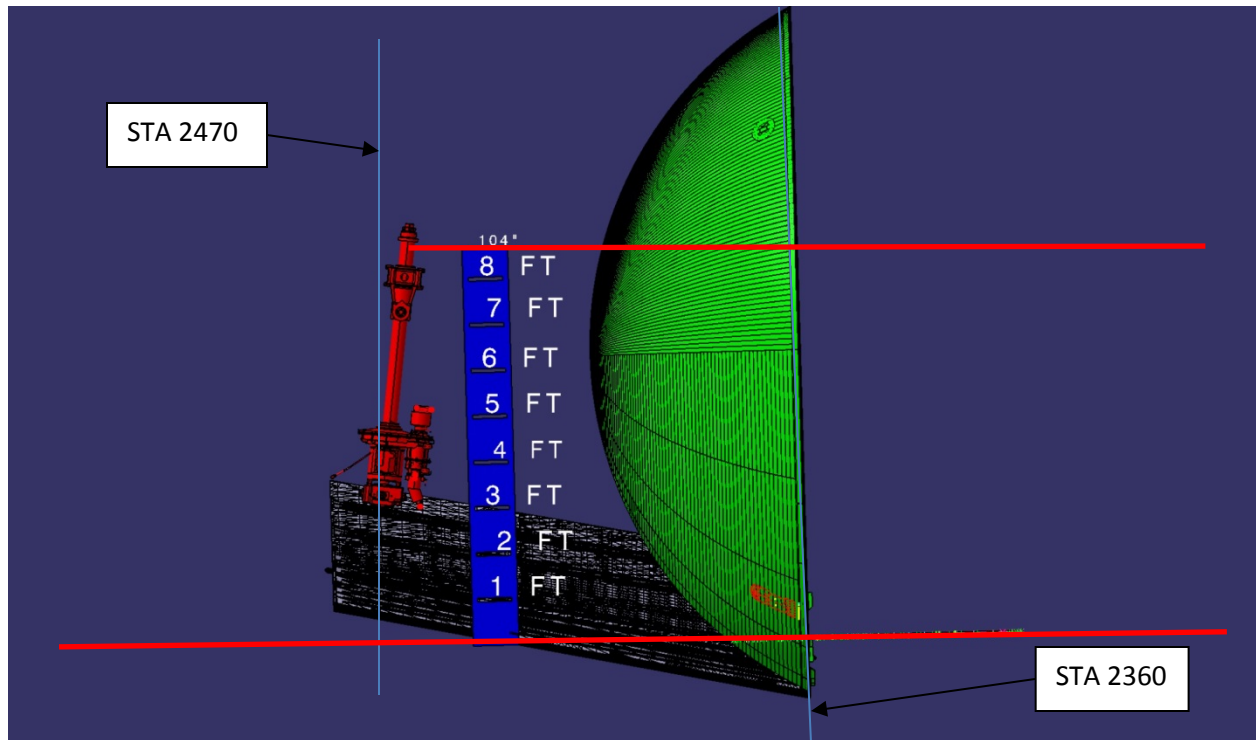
Aft Pressure Bulkhead and Jackscrew side view
